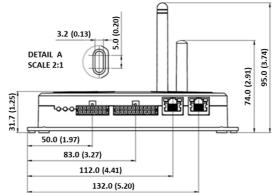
TDC-E, dimensions and mounting holes, (all dimensions in millimeters (inches))
